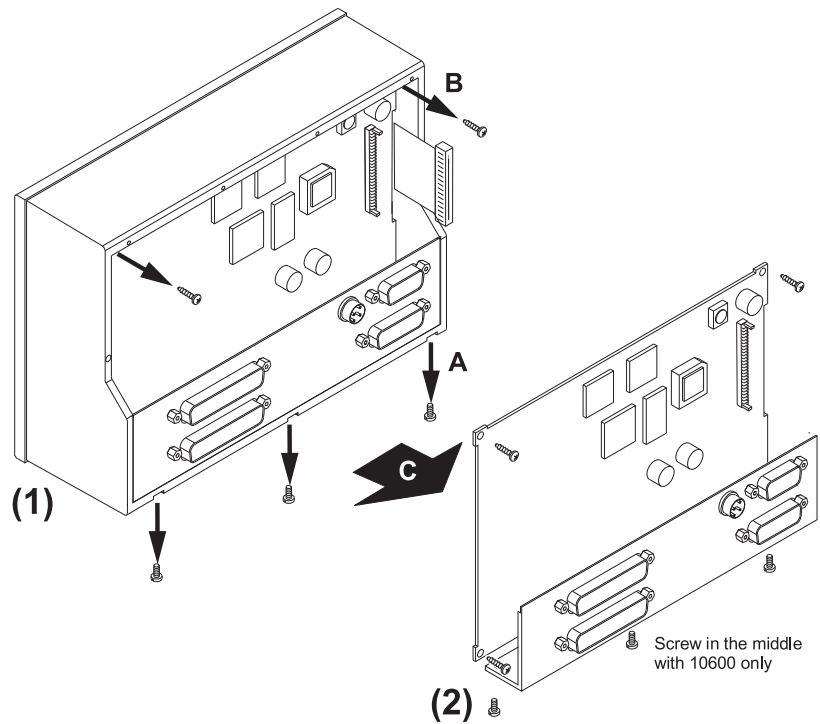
Unscrew and removal of connector panel and main pcb
